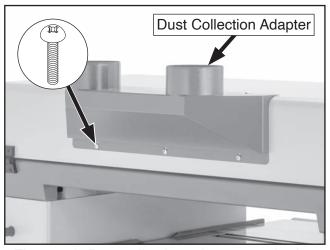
Dust collection adapter attached to top cover (G0988 shown).
